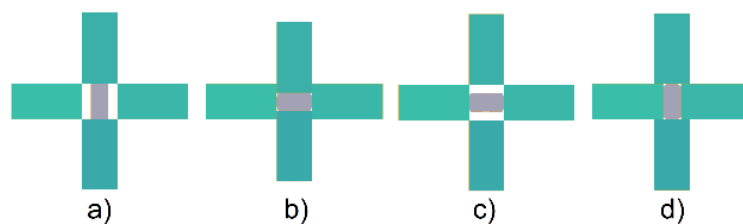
Initial state of a two-way forging cycle (a), final state of the first forging step (b), resetting of the tool position before the next step (c) and final state of the second forging step (d). The workpiece is grey, and the tools are green.
